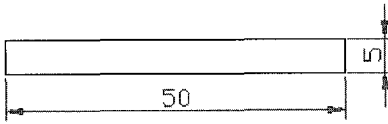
Dimension of deflection test specimen(unit : mm, thickness : 0.2)
